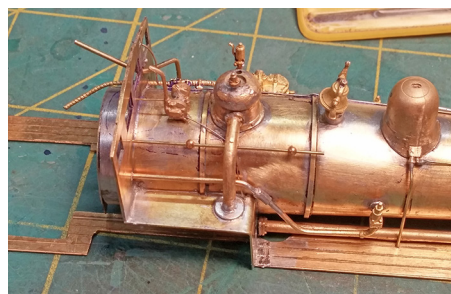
The hand rail stanchions (Cary #13-118) were soldered in place using Rickety Rails detail solder. A length of .020" brass rod was slipped through the stanchion's holes the keep them properly aligned while soldering. This piece of brass rod will be used later to mark the rod's center on the cab front for drilling later.
